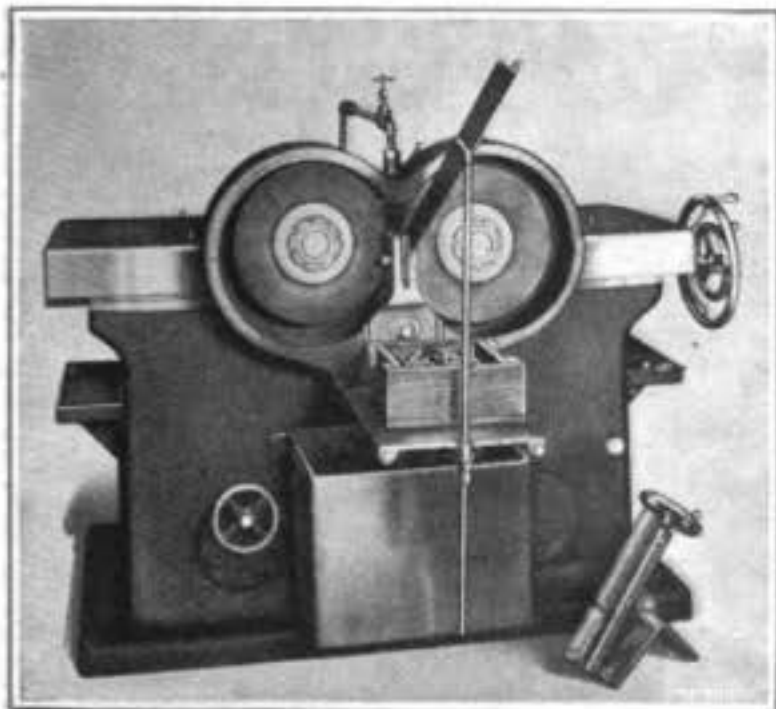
Heim Centerless Roll Grinder with Wheel Housing Cover removed
